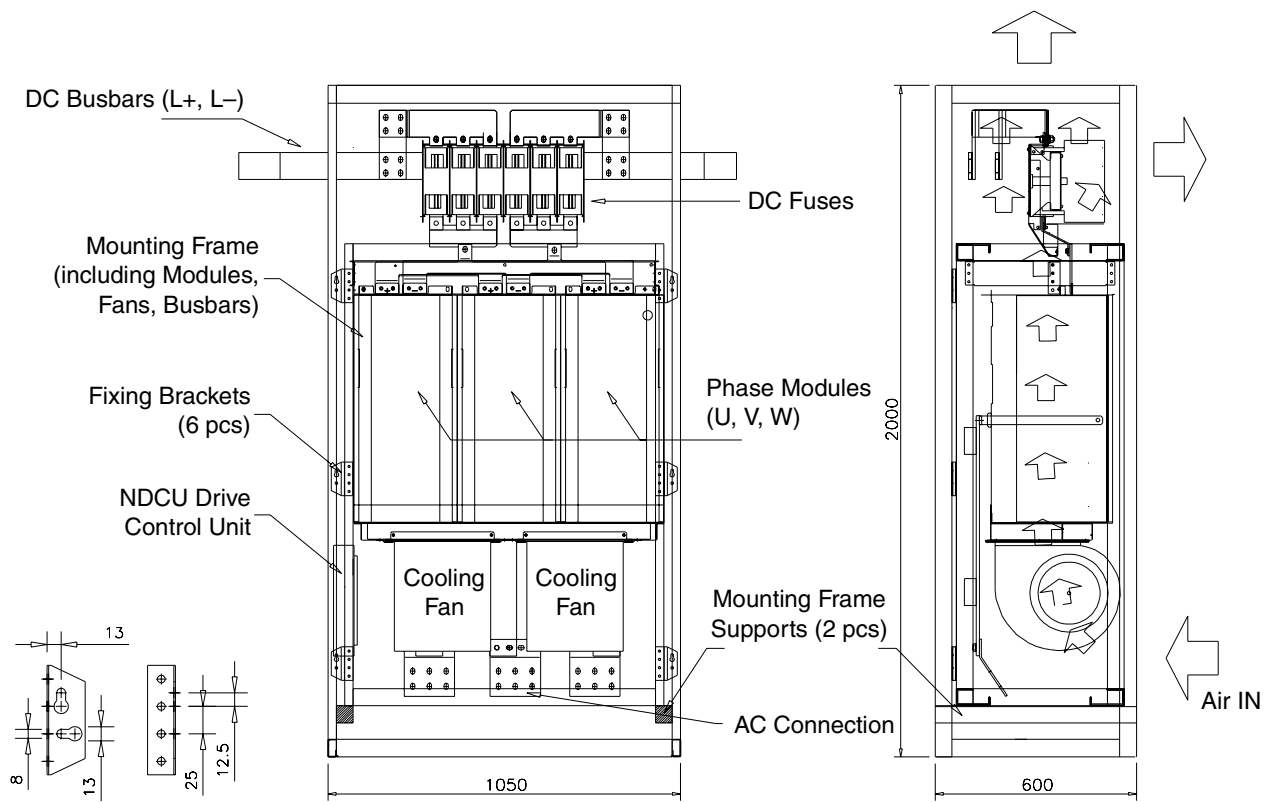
Cabinet layout example for R10i and R11i modules – Installation using the mounting frame.
